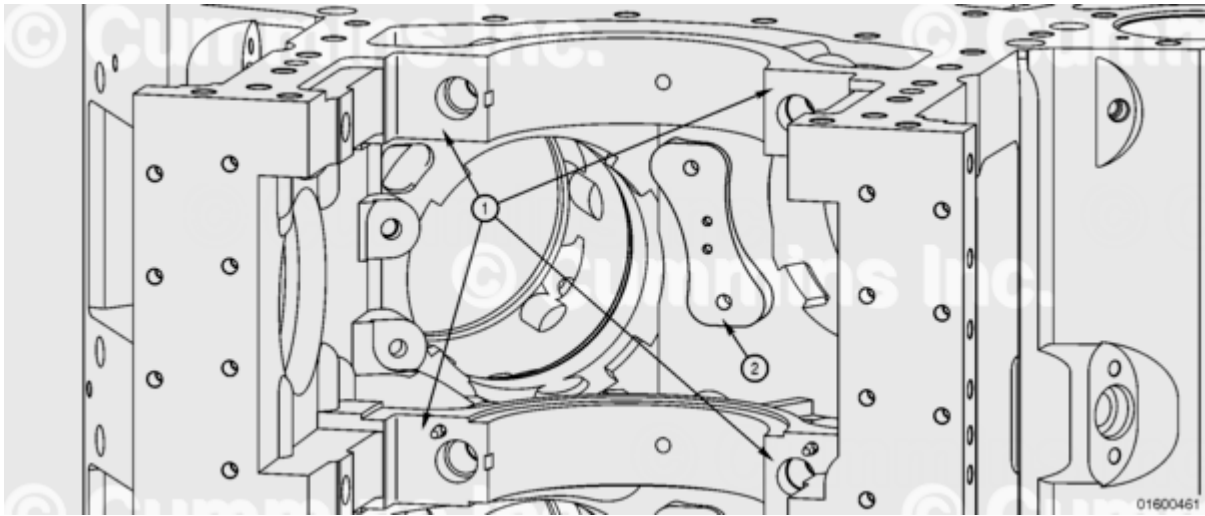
Upper Piston Cooling Nozzle Reference Points (1) Datum A, (2) Mounting Pad
